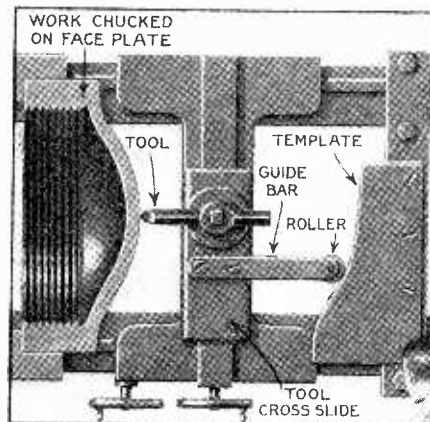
A boring tool and a template are useful in turning a cylinder of large diameter.
